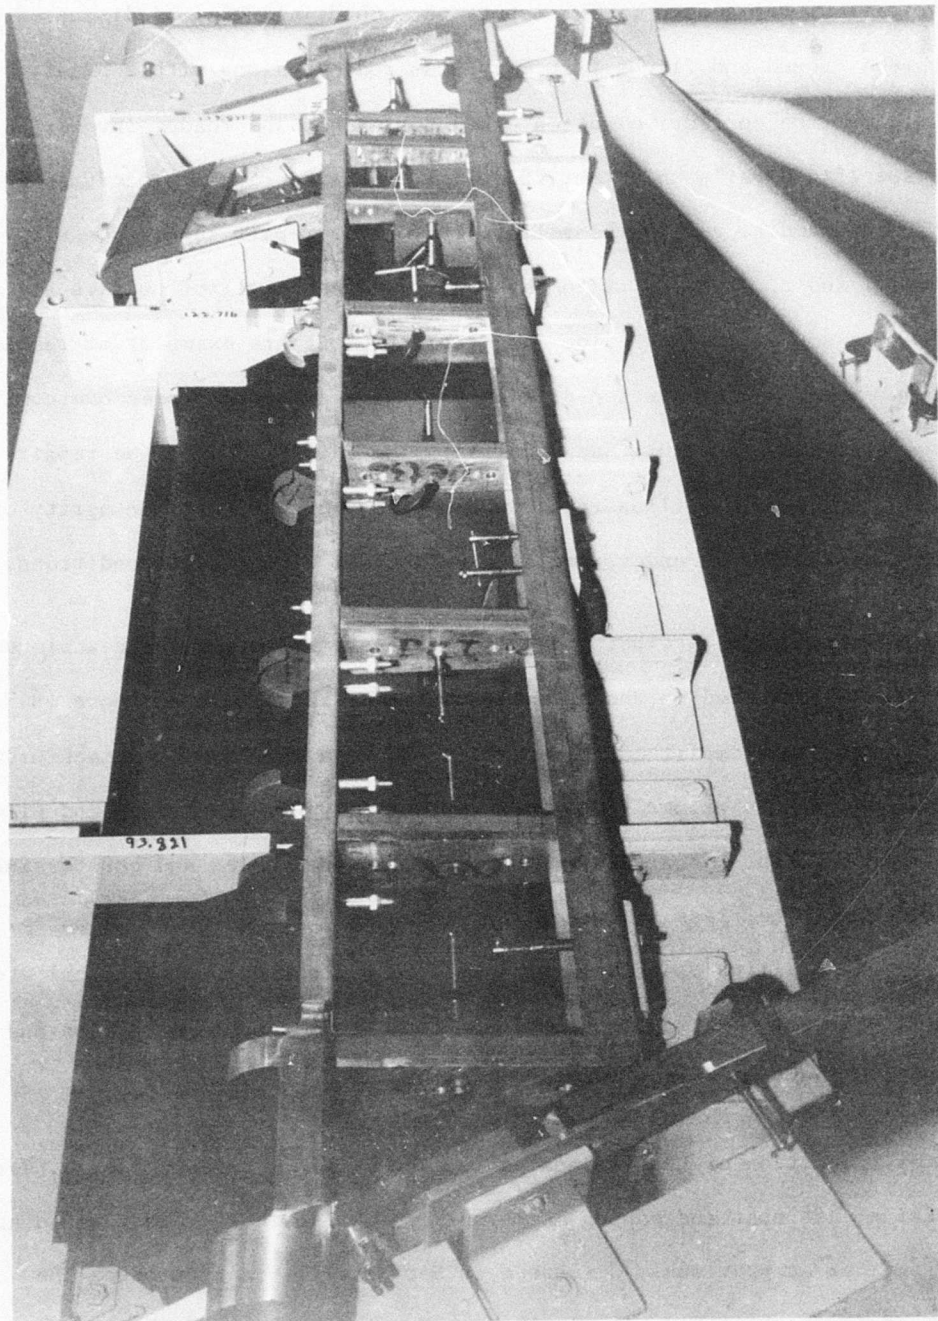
Pre-Fit Assembly of Beryllium Rudder In Assembly Fixture
